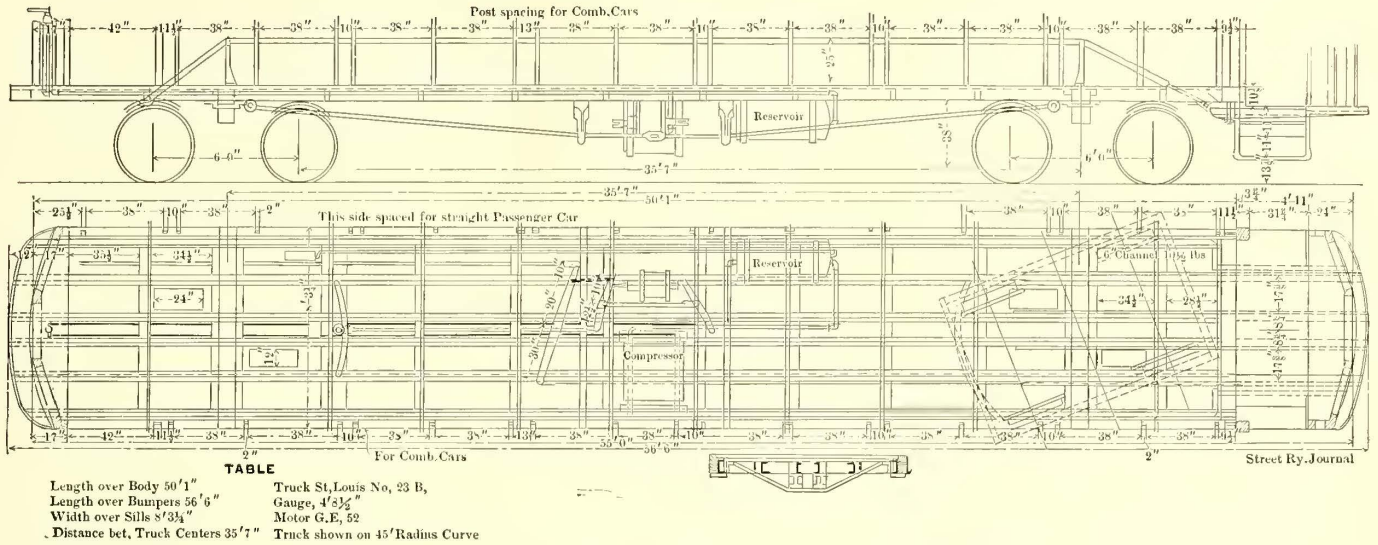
FLOOR FRAMING OF CANTON & AKRON CARS
